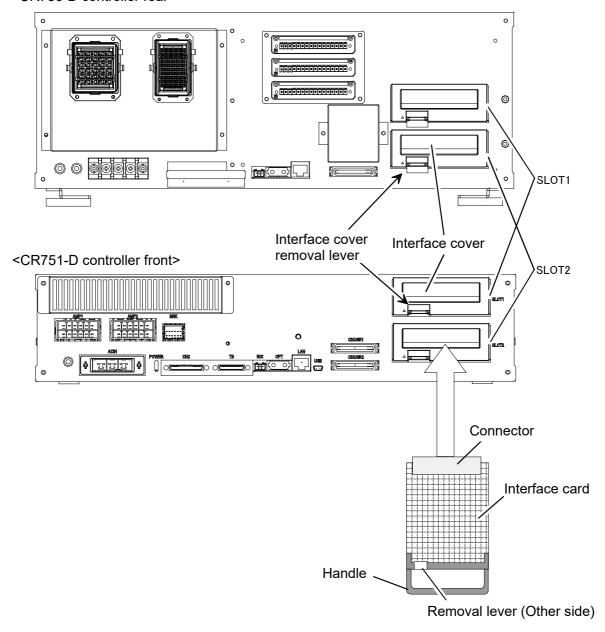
Mounting of the CC-Link interface card (CR750-D/CR751-D controller)
